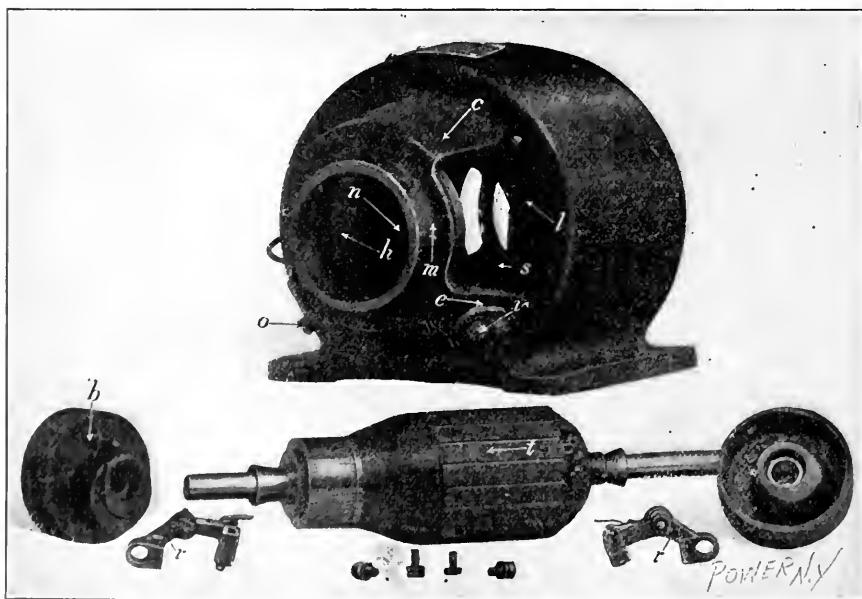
PARTS OF THE BIPOLAR GENERATOR SHOWN IN FIG. 290
